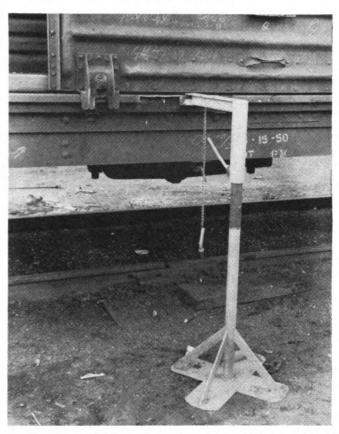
With a notch larger than the door roller casting burned out of the door track, the groove on the end of the stand can be slipped under the door track and the door pulled out as shown in Fig. 3.
